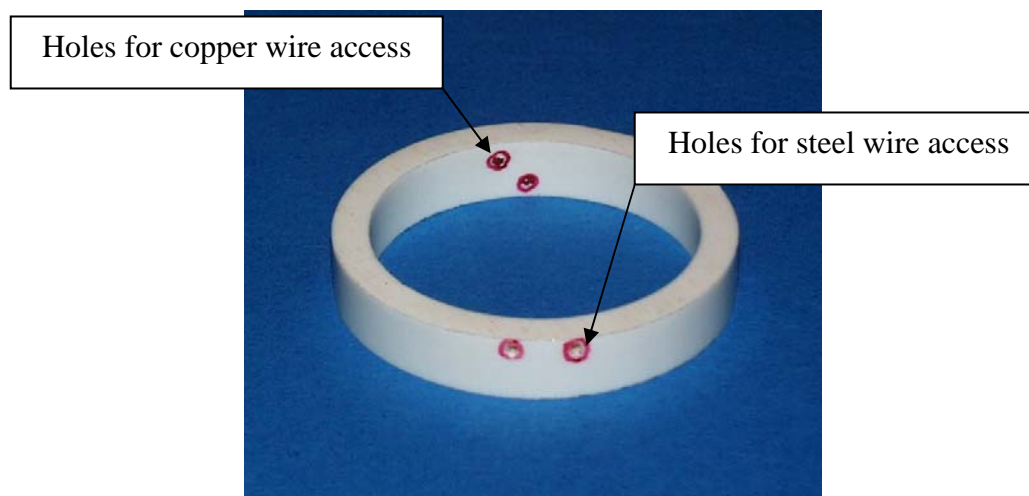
Half-inch Wide PVC Pipe with Drilled Hole Layout
